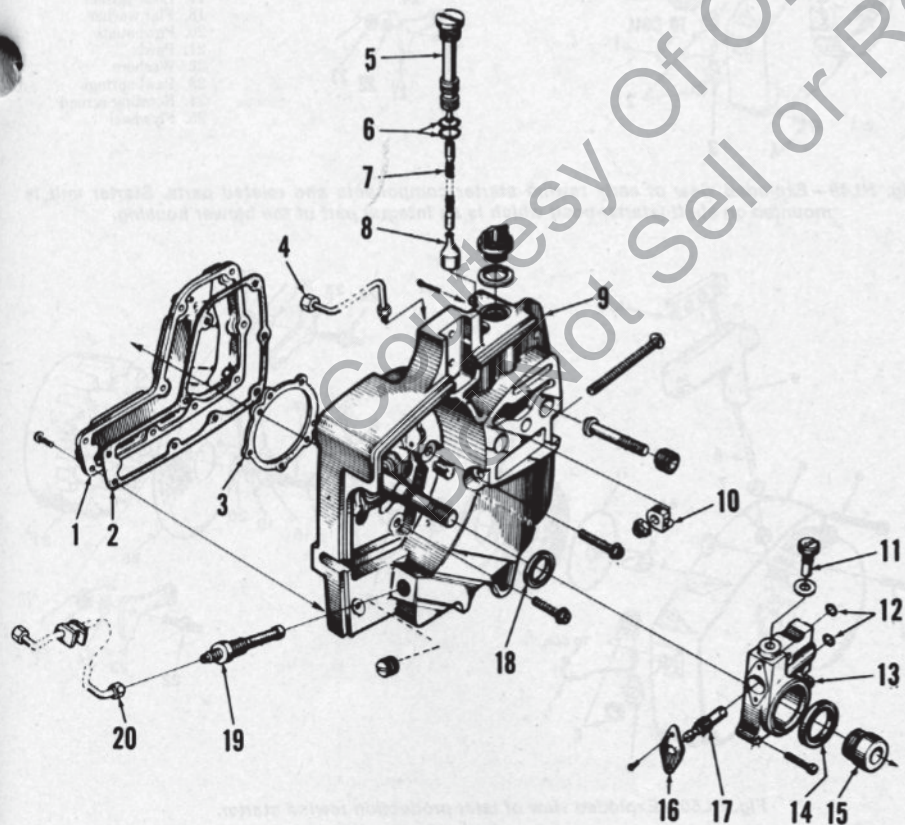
Exploded view of automatic chain oil pump on models so equipped.
